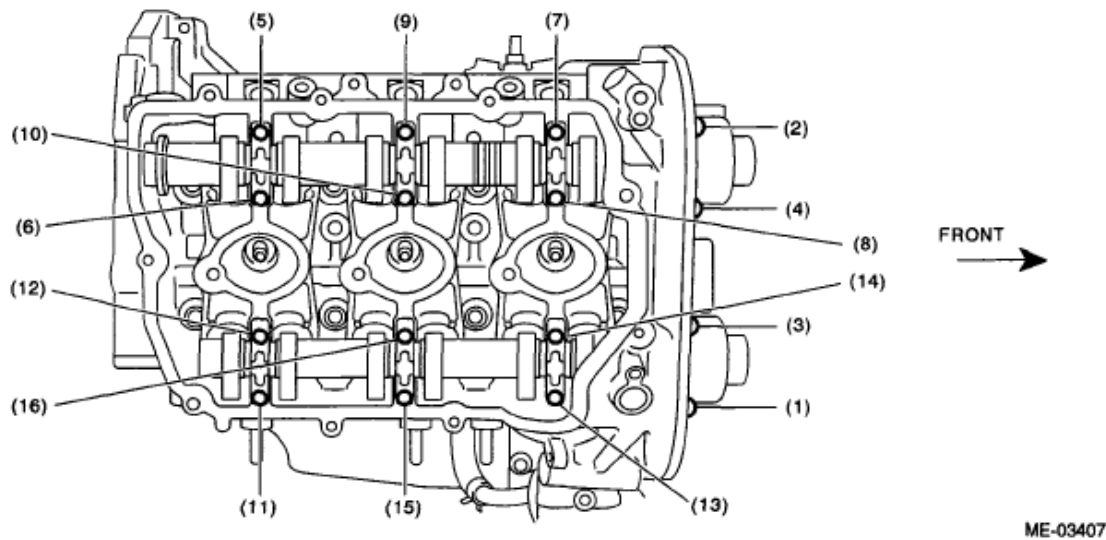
Identifying Camshaft Cap Bolts Loosen Sequence
